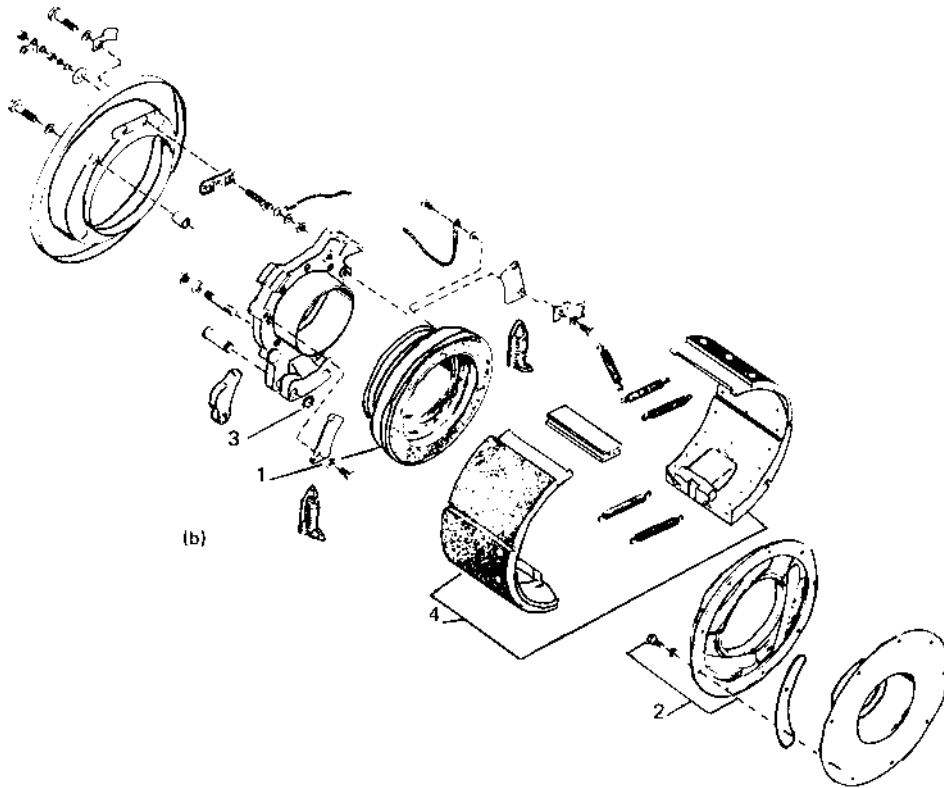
Exploded view of the components of the electric brake shown in [Figure 20](#). (Courtesy of Warner Electric Brake & Clutch Co., South Beloit, IL.)
